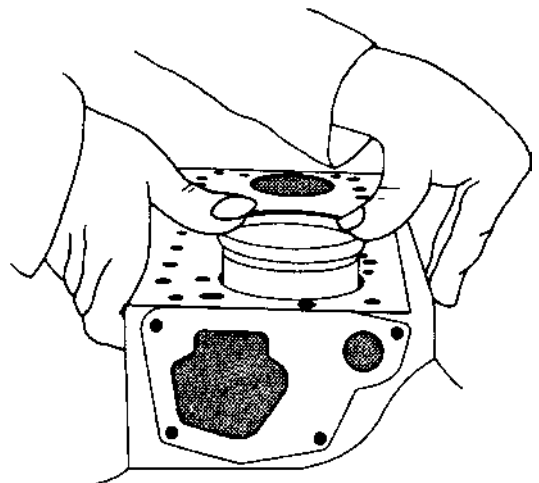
Inserting a wet cylinder liner by hand (Perkins)
